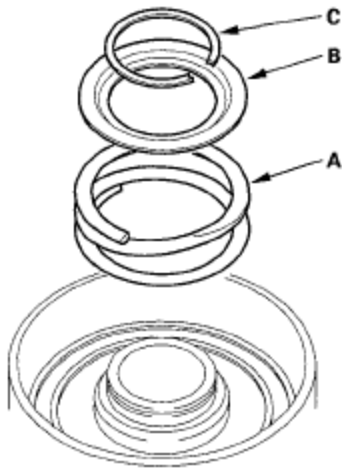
Identifying Return Spring, Spring Retainer And Snap Ring
